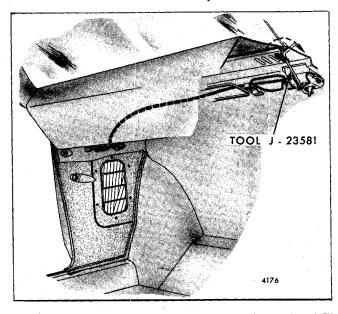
Hood Latch Auxiliary Release Tool - H-15 and 77 Styles
